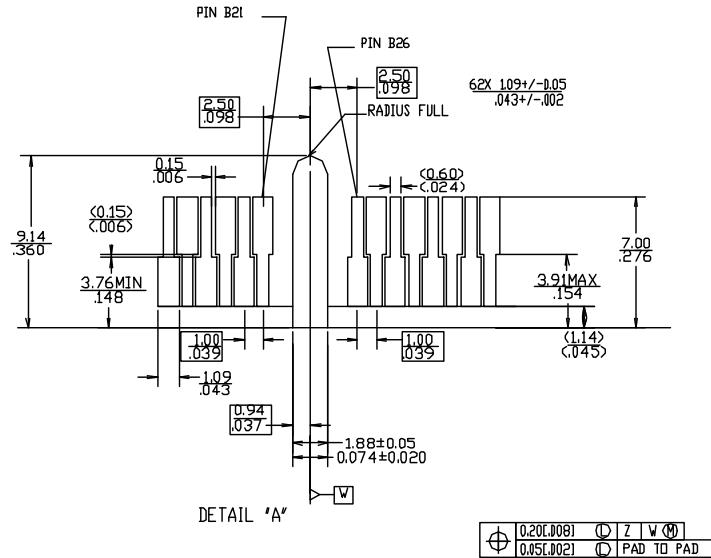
Detail A, A.G.P. Card Edge Finger Layout
